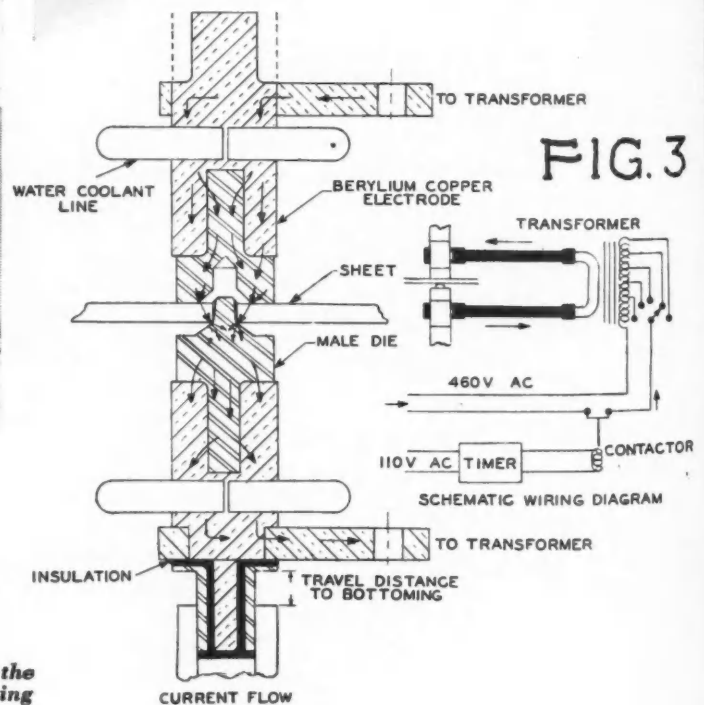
Schematic drawing illustrating the flow of current in the resistance heating dimple tool.
